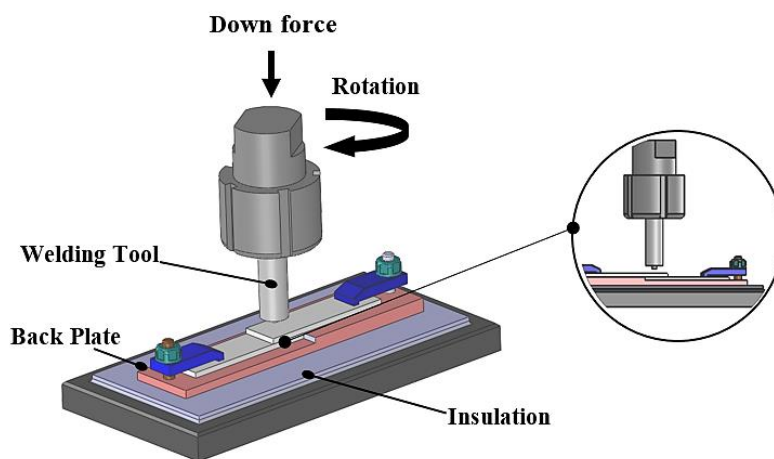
Lap joint of FSSW of SSM 356 aluminum alloy
